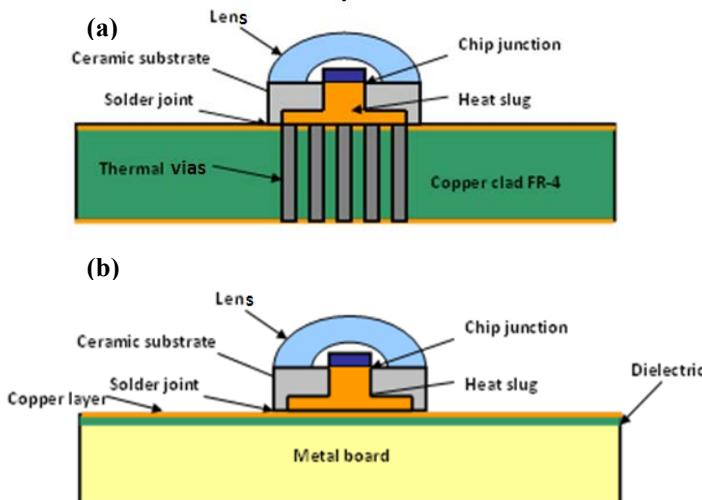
Diagrams of LED chip package mounted on (a) FR-4 PCB with thermal vias, and (b) metal core PCB
